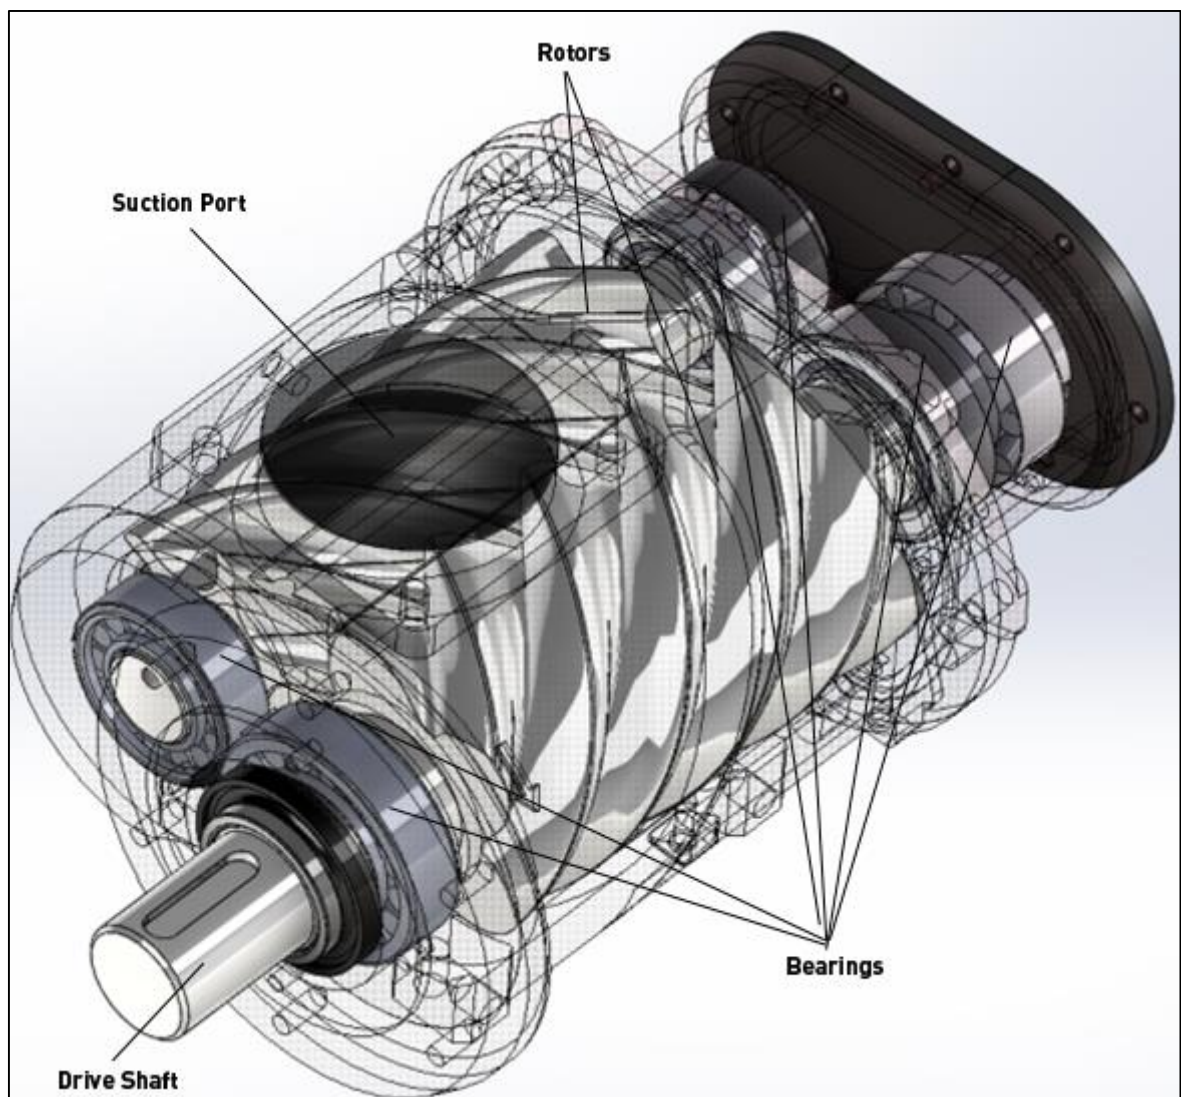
Oil injected screw compressor 3D model shows rotors in casing
